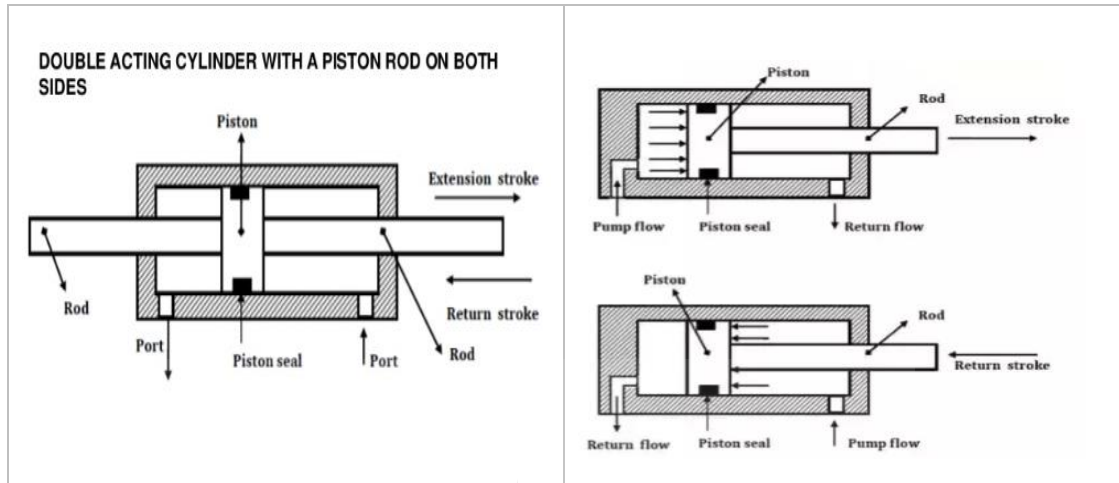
Steering cylinder diagram & Double acting Lifting cylinder [40, 41]
